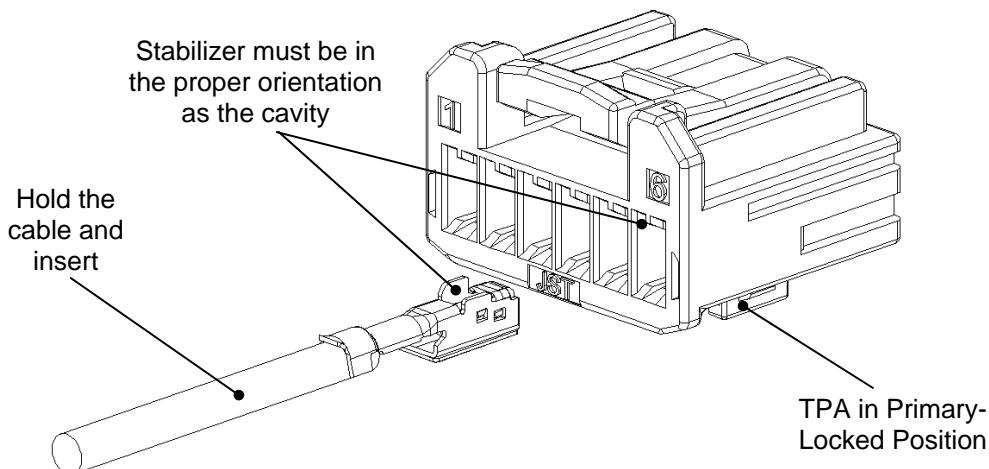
Insertion of Female Terminal to Female Housing Assembly (e.g. 6 positions)
